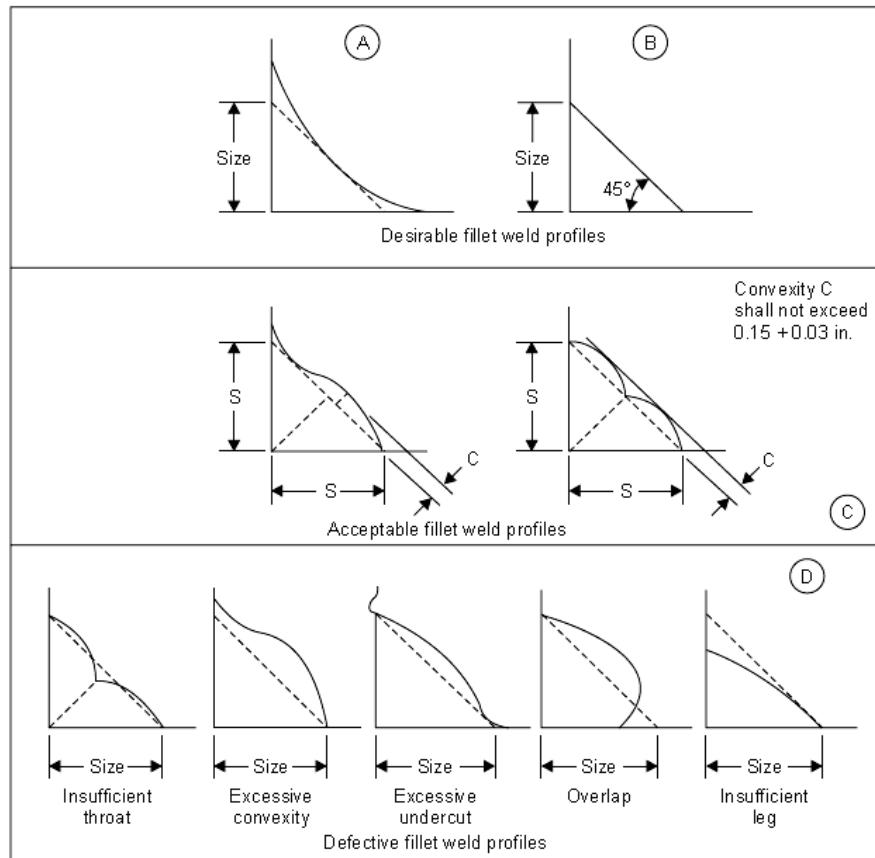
Desirable, acceptable, and defective fillet weld profiles
